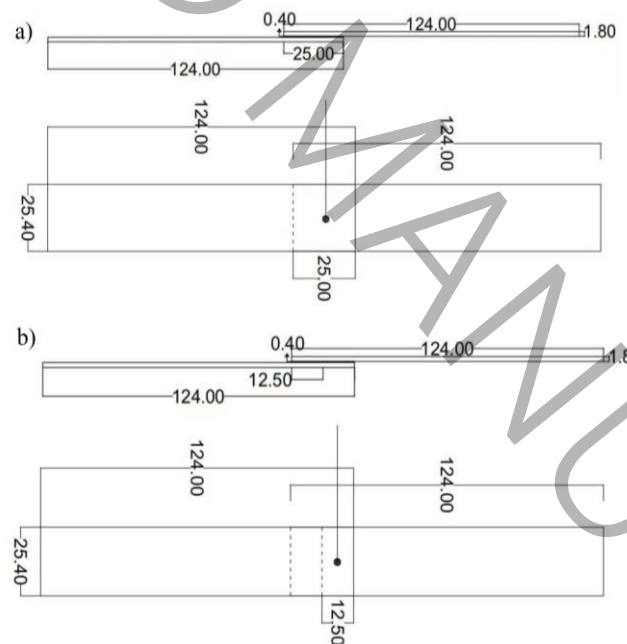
Technical drawings of : a) The intact specimen, b) The defective specimen (units are in millimeter).
